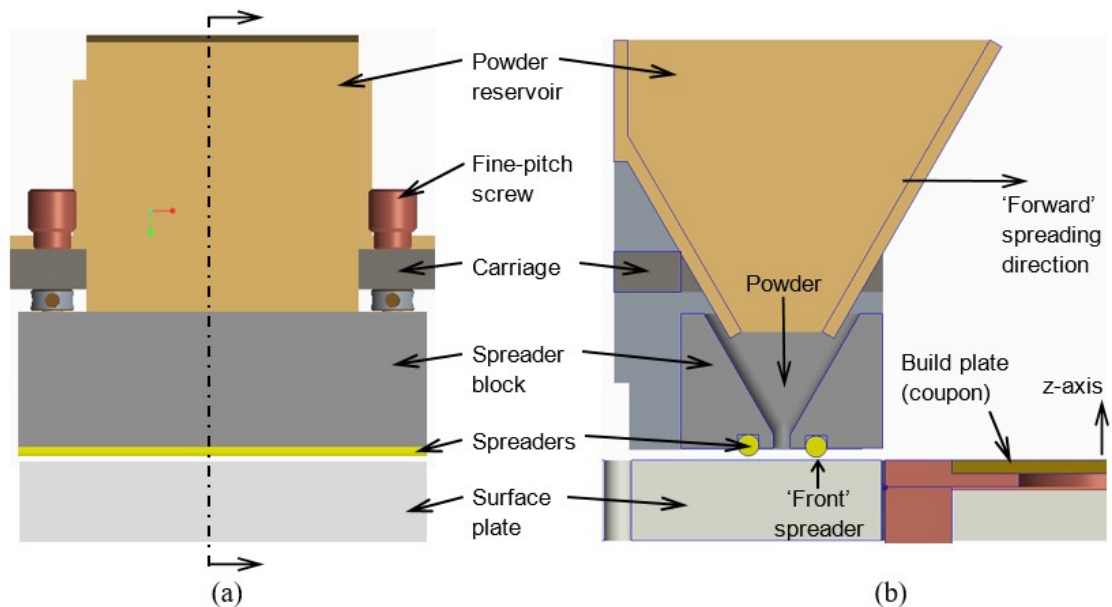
Detail of powder spreading system. (a) Front view showing the powder spreader block mounted on its carriage with the fine pitch screws to adjust the height of the spreaders above the surface plate. (b) Side view (cross-section) showing the relative height of the spreader above the surface plate
